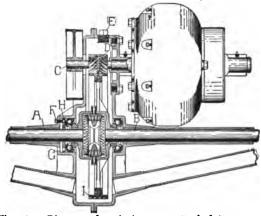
Diagram of a single motor attached to rear axle through "herringbone" single reducing gears. A, is the left hand section of the divided rear axle; B, the right hand section of the rear axle; C, the brake drum; D, the spiral pinion on the motor shaft driving the worm gear, I, on the differential; E, plug for greasing gears; F, set screw for locking ball race; G, slot for wrench to adjust threaded ring, H, against ball bearings.
